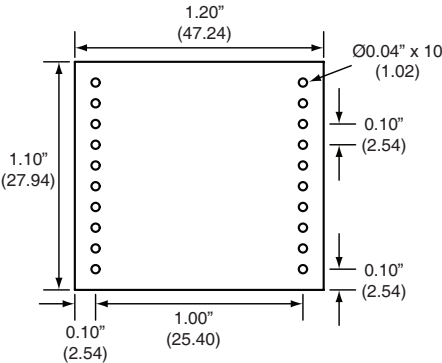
EVM-GPS-R4 PCB Layout Dimensions
